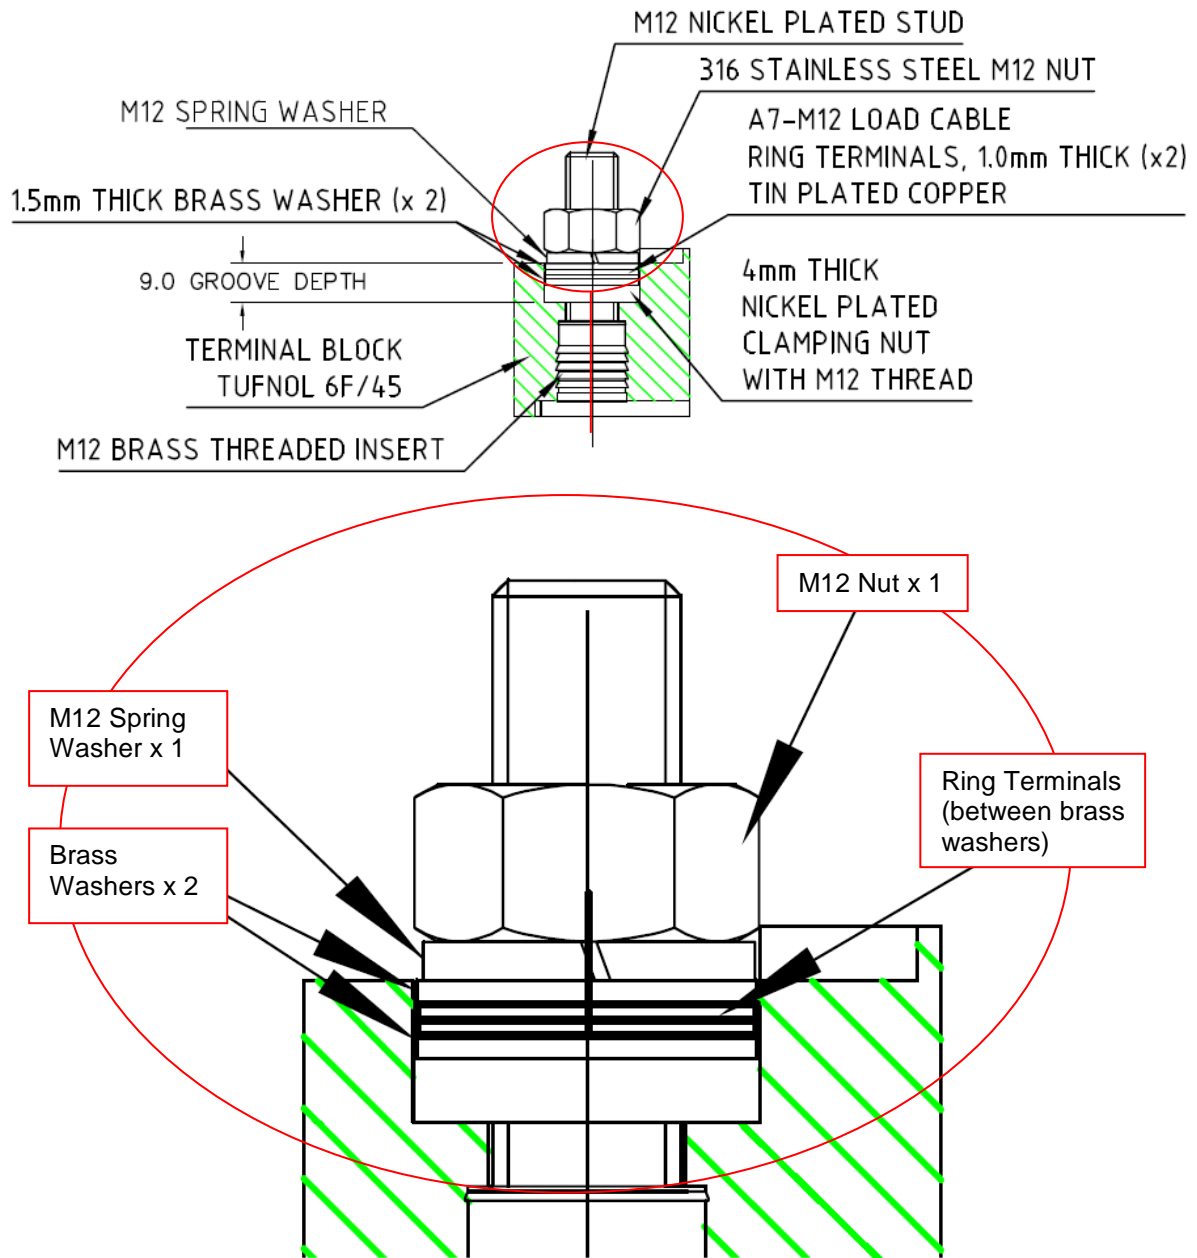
U1, V1 and W1 Nut, Washer and Ring Terminal Arrangement
